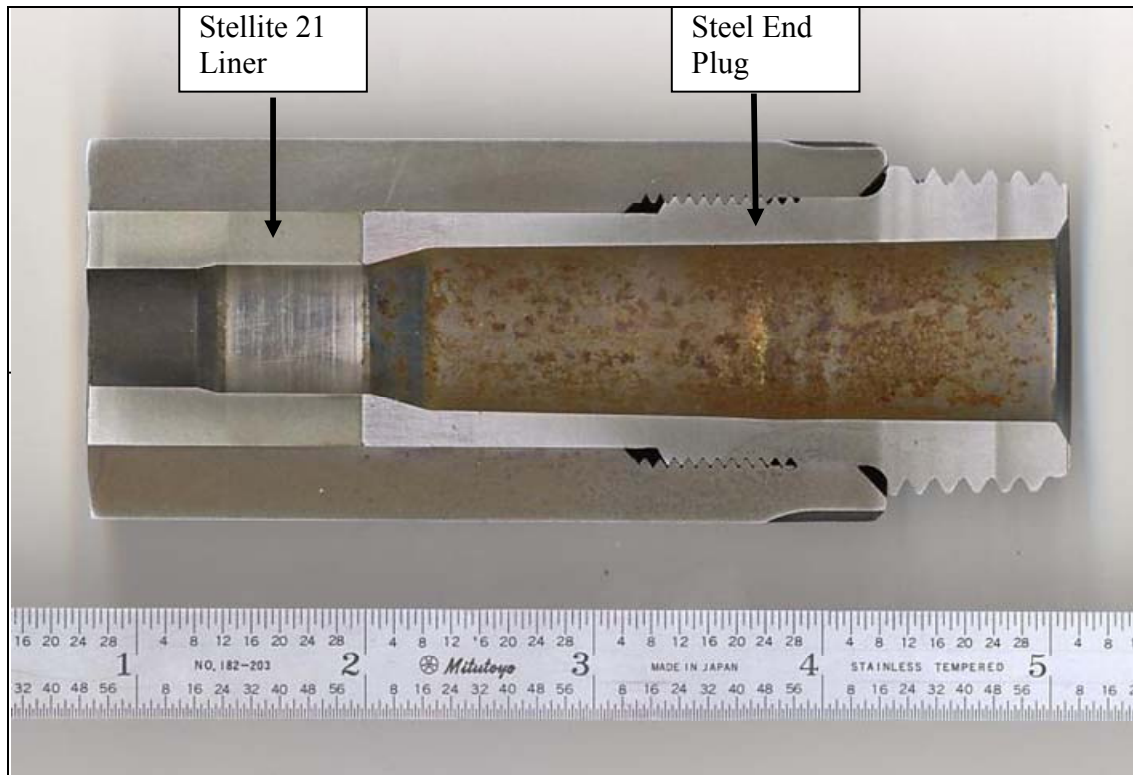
Sectioned breech end of the first 0.50-cal. M2 machine gun barrel.
